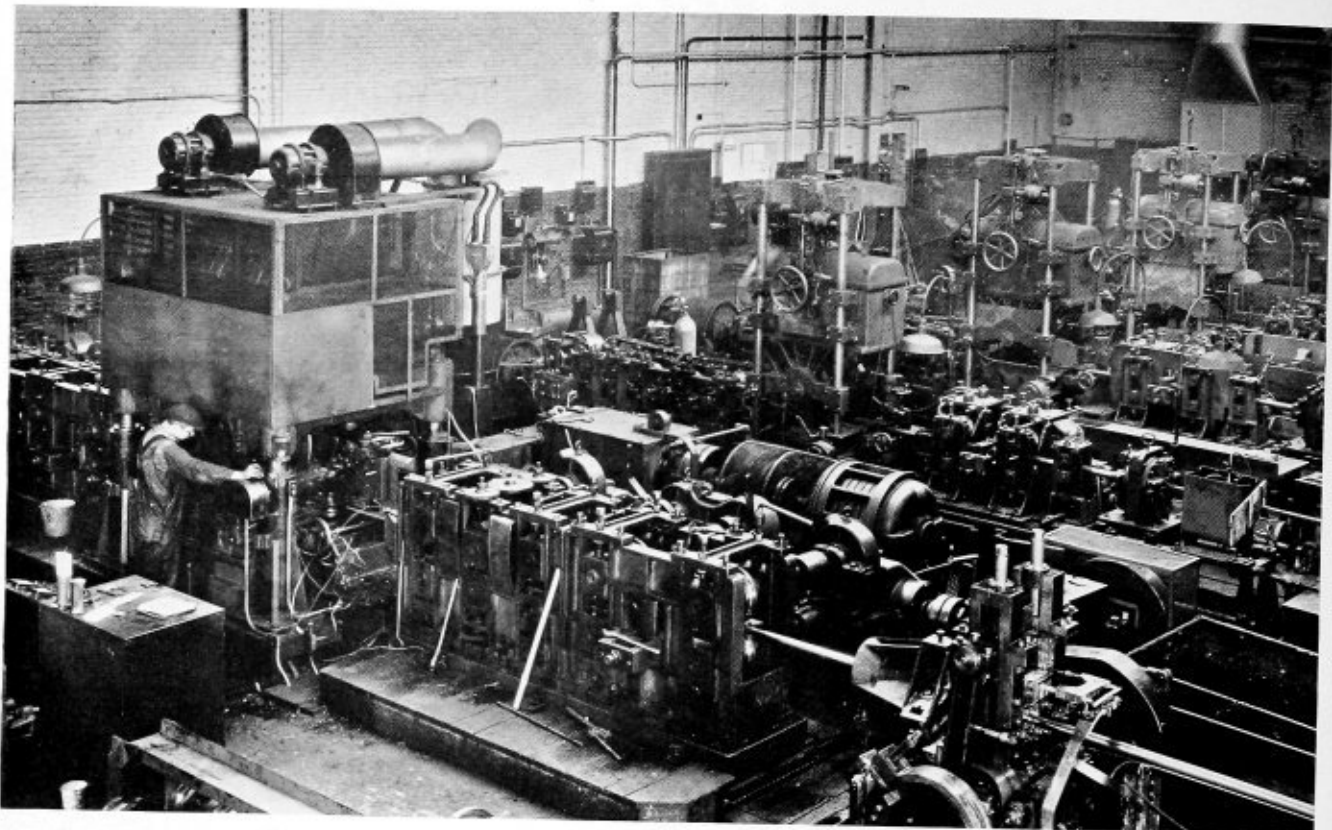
Mill room, showing Johnston electric weld tube mill in operation at left
